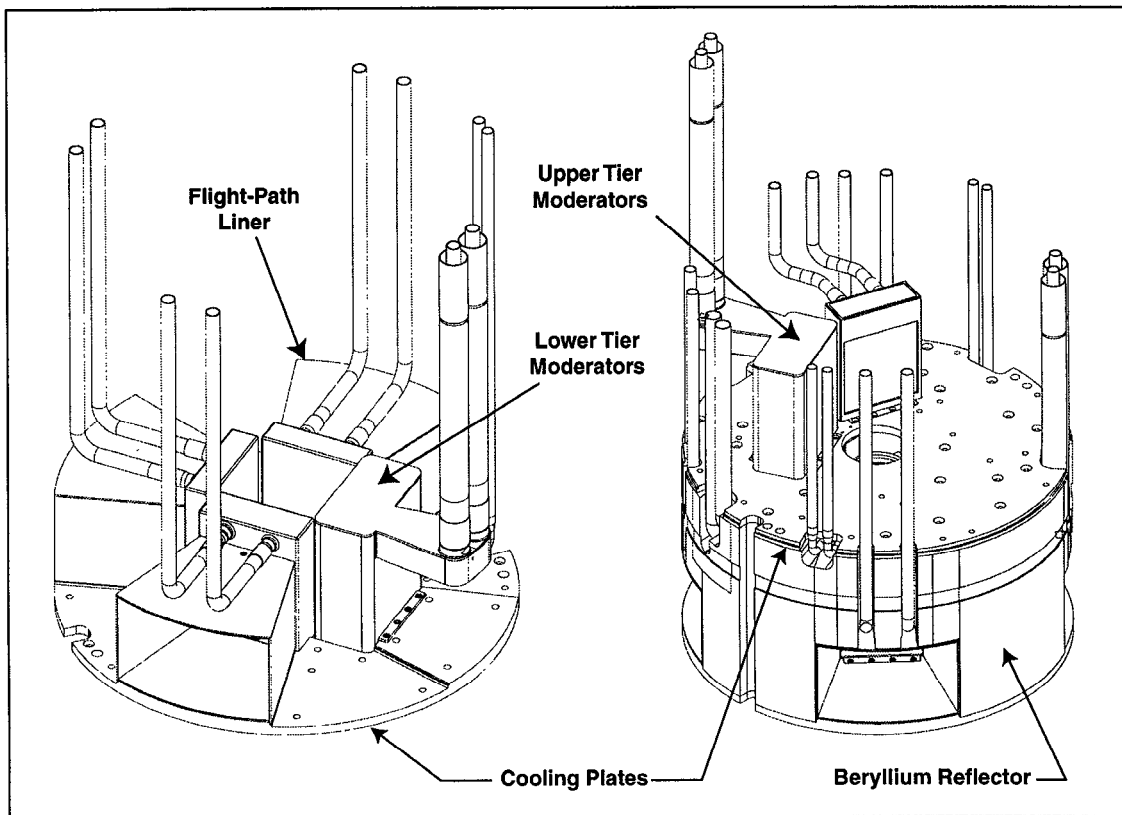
Aluminum Cooling Plate and beryllium inner reflector
